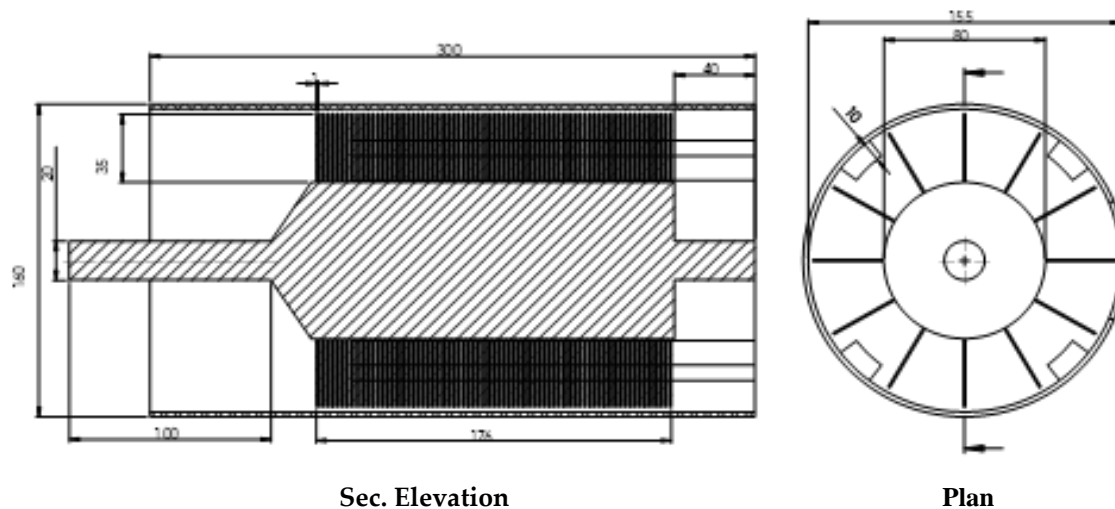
Elevation and plan of the drum peeling chamber. (Dims, mm)
